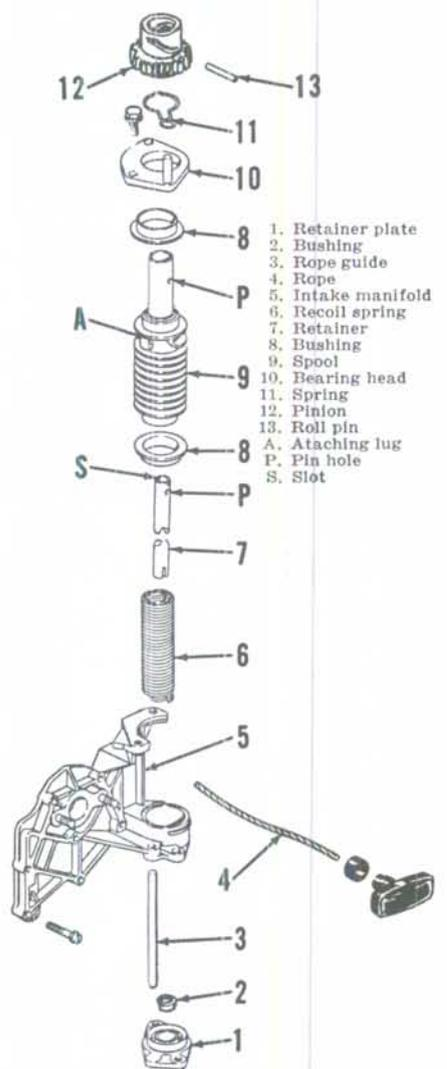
Exploded view of recoil starter and associated parts. Intake manifold (5) contains the mounting bracket for starter unit.
